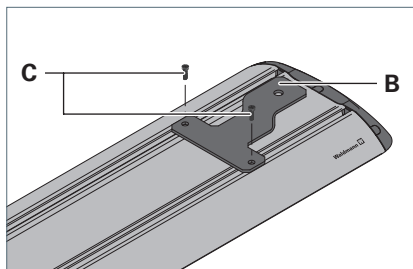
Mounting the bracket for mounting type "Top, fixed", 1st option.
